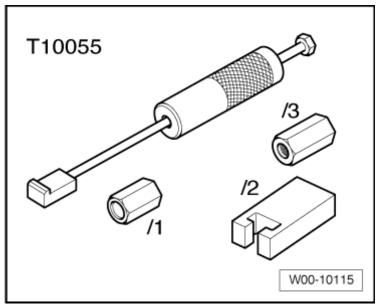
Identifying Puller T10055 With Adapter T10055/3 Courtesy of VOLKSWAGEN UNITED STATES, INC.
